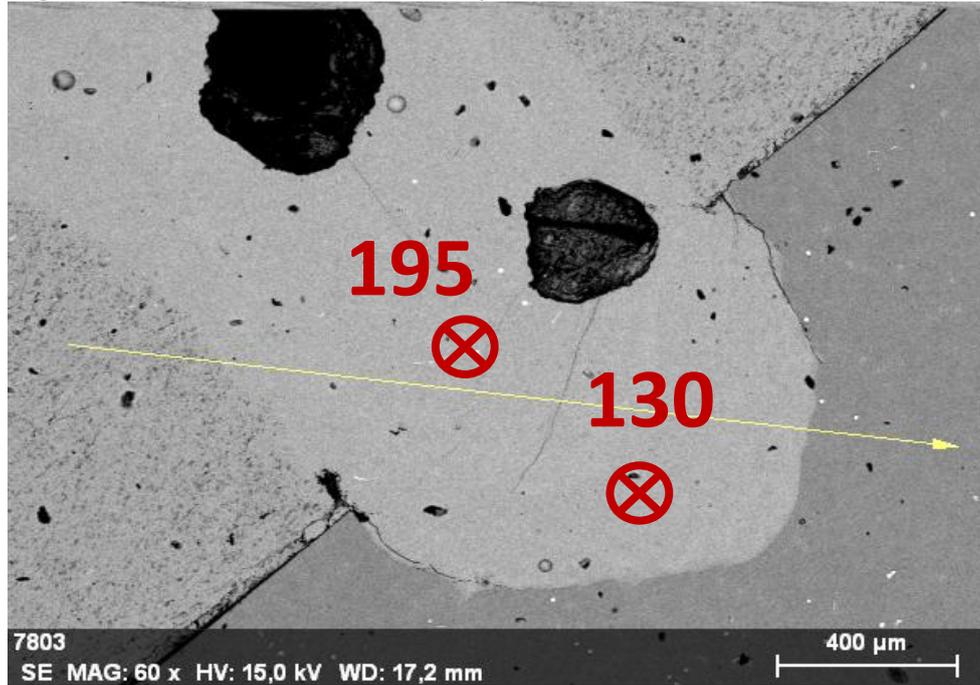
Hybrid Weld, Hardness of the Base Materials, Cross-section View
